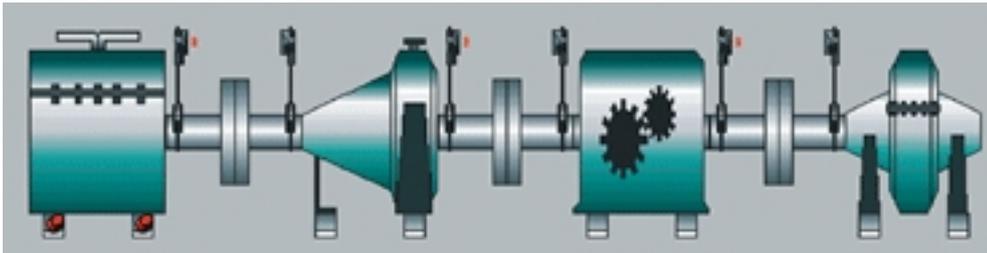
Schematic of steam turbine-boiler feed pump-gearbox-booster pump machine train that was recently aligned using a laser alignment system.
